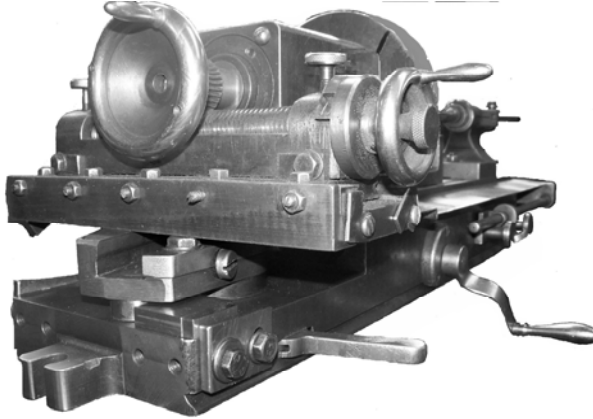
The grinding device for helical surfaces with adjustable step and tilting slider
